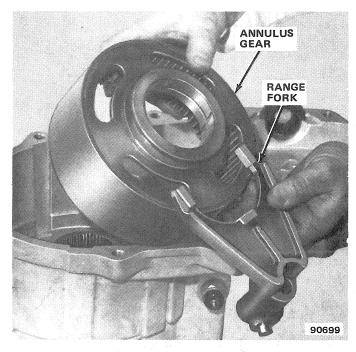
D-59 Annulus Gear and Range Fork Removal/Installation
